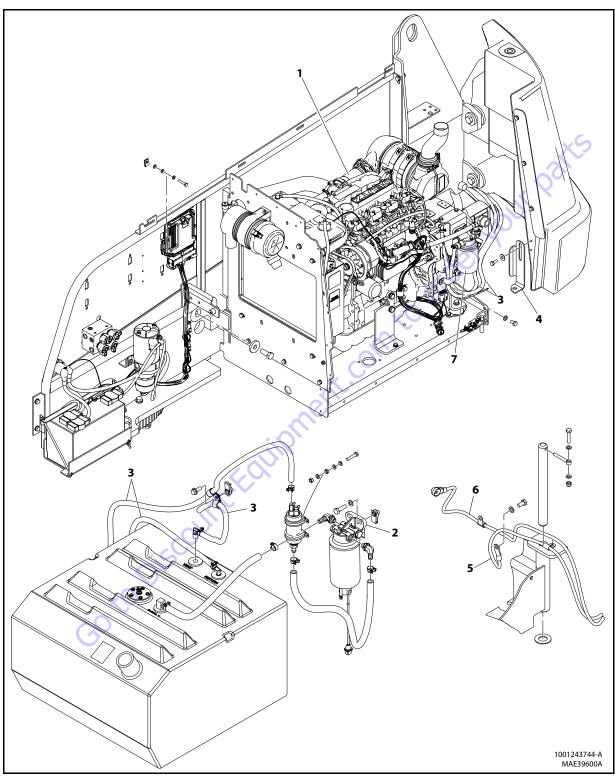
Deutz TD2.9 L4 (67hp) Engine Assembly - Sheet 2 of 2
